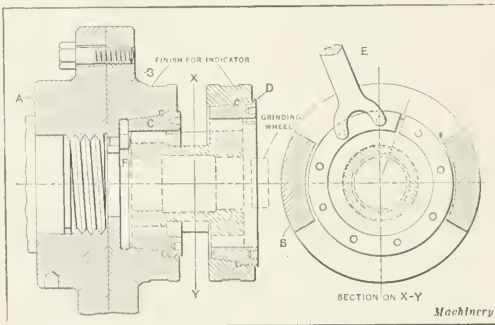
Special Type of Chuck for holding Double Spur Gear, made by Heald Machine Co.
